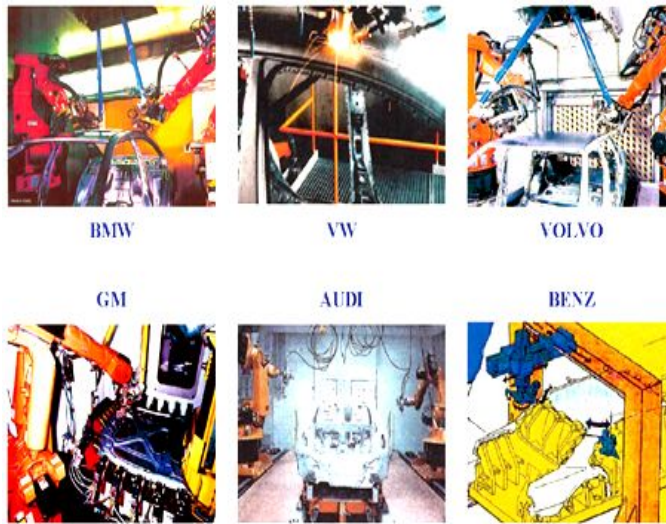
Application of Laser Welding in the car body assembly
